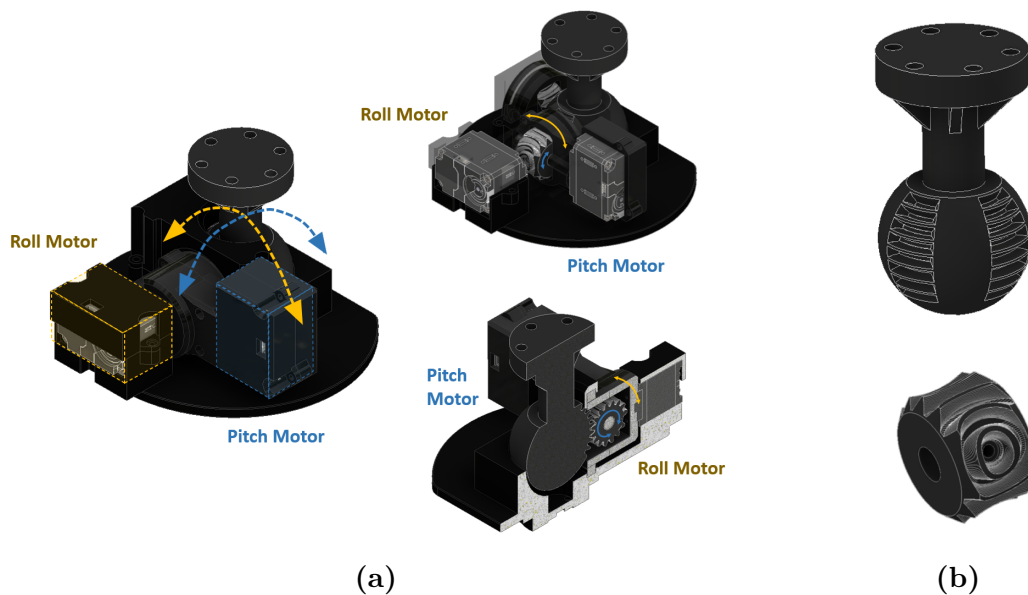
Details of the 2-DOF Spherical Gear Mechanism: (a) Mechanism actuation, (b) Spherical gears detail.
